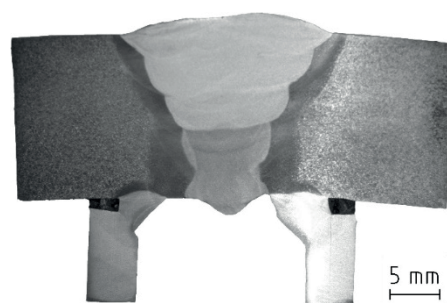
Macrograph of butt weld joint between sphere-like parts of the sleeve
